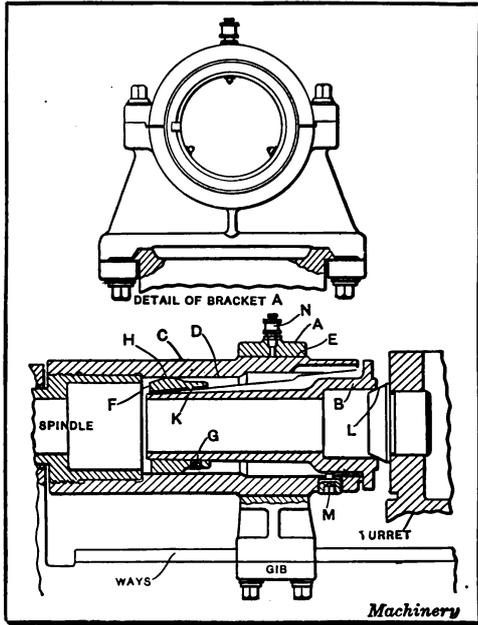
Fixture for holding a Long Part—Outer End is supported by Bracket
